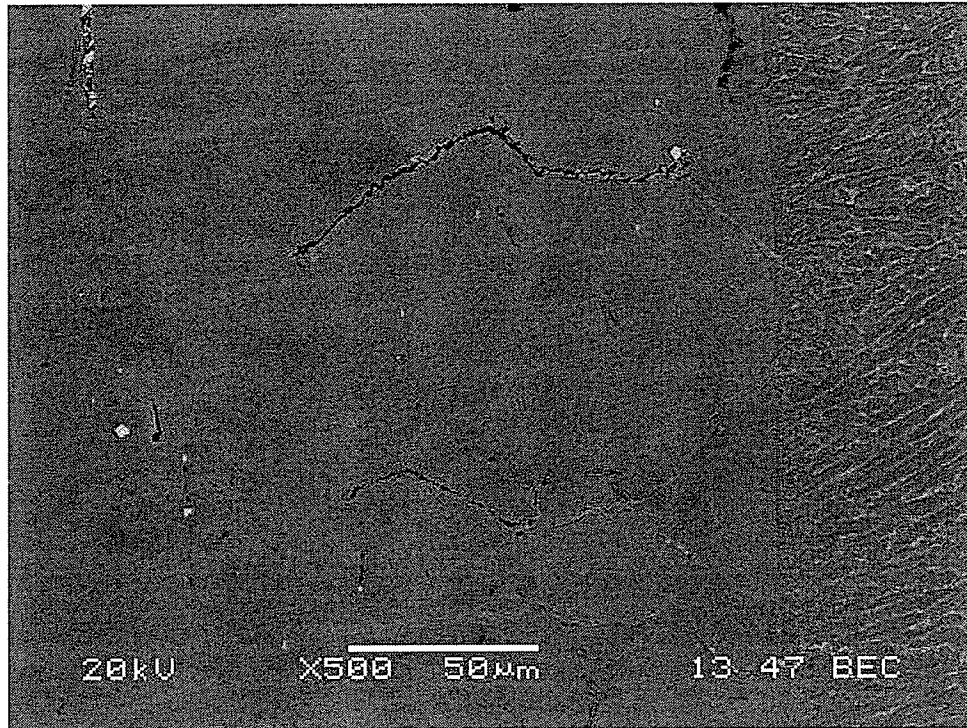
Intergranular microfissuring in HC 49 electron beam welded samples made out of 6 mm diameter rods
